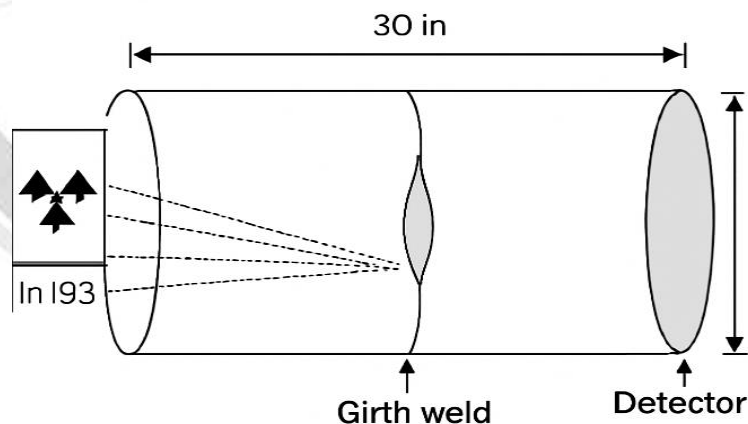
Schematic representation of X-ray inspection geometry for high-pressure pipeline girth welds.
